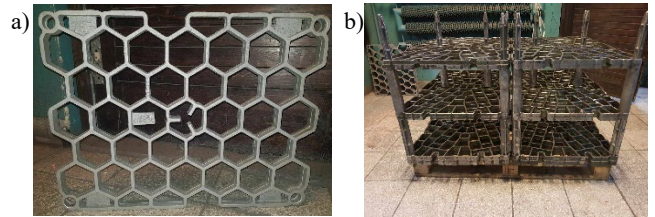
Equipment for transporting loads in heat treatment furnaces: a) pallet, b) three-level assembly
